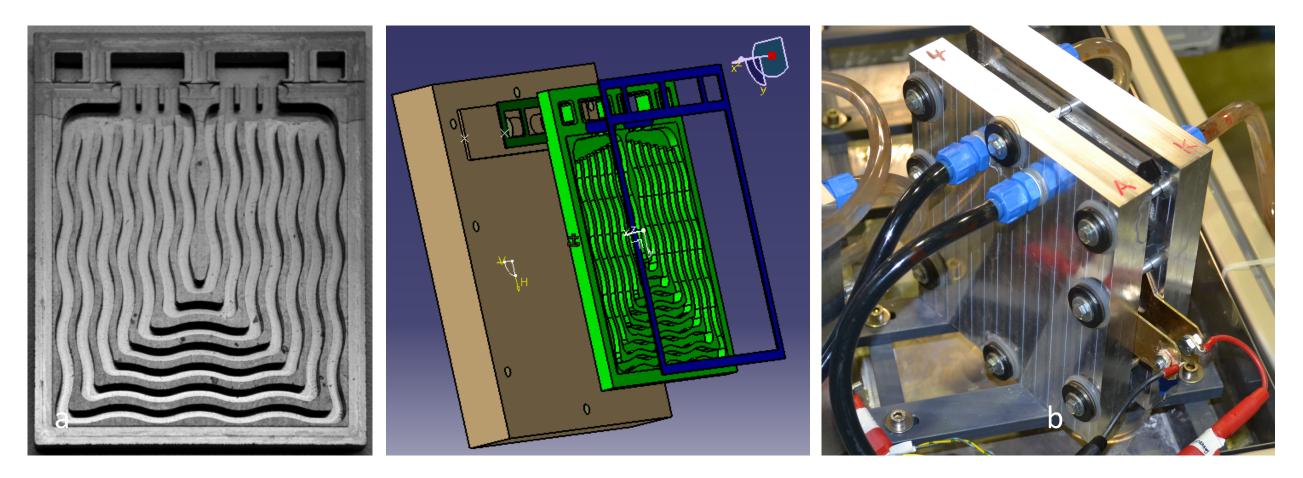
Photo of modular electrode design (a), exploded drawing (b) [2], complete laboratory cell (c)
